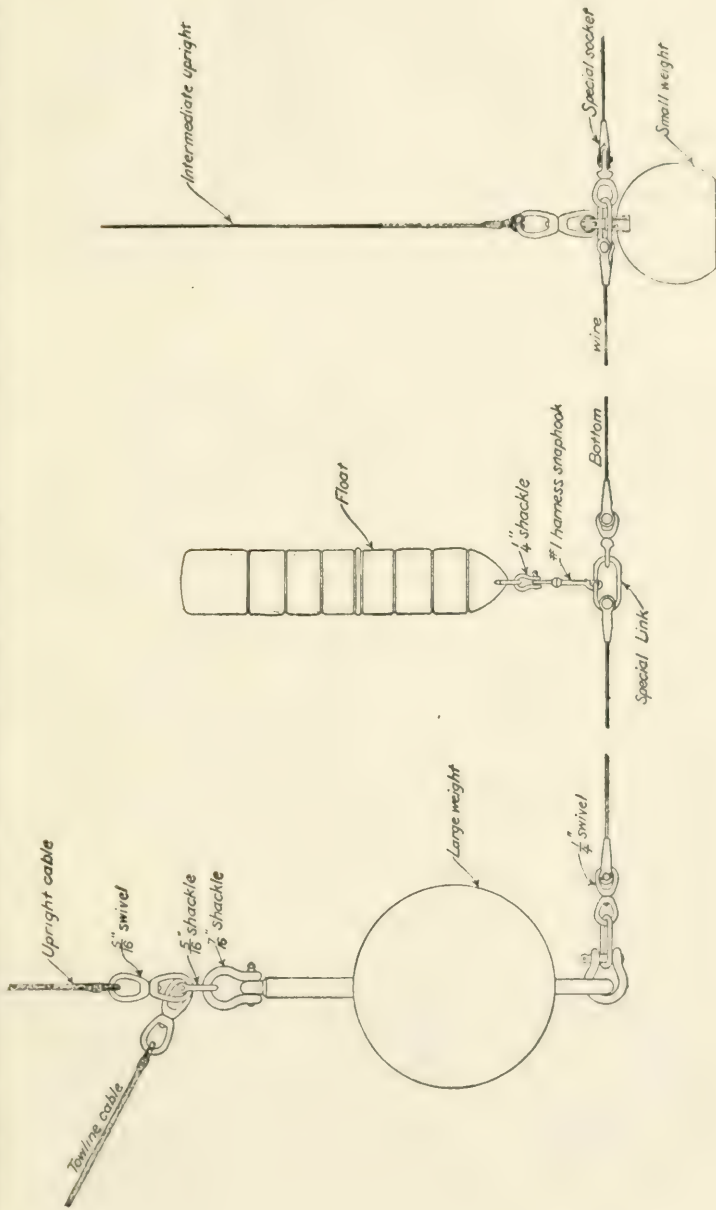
METHOD OF MAKING CONNECTIONS.
